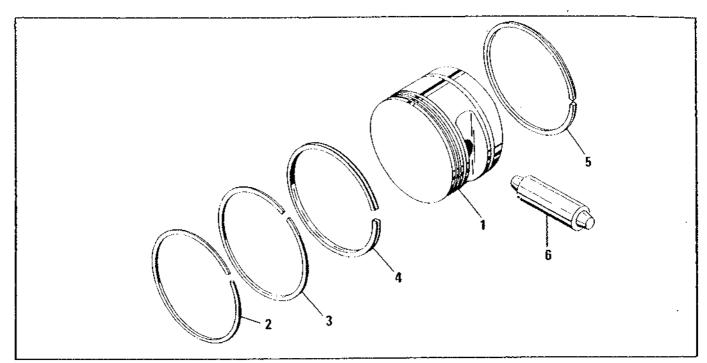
PISTON AND RING ASSEMBLY MODELS 0-470-K,L,R,S,U
